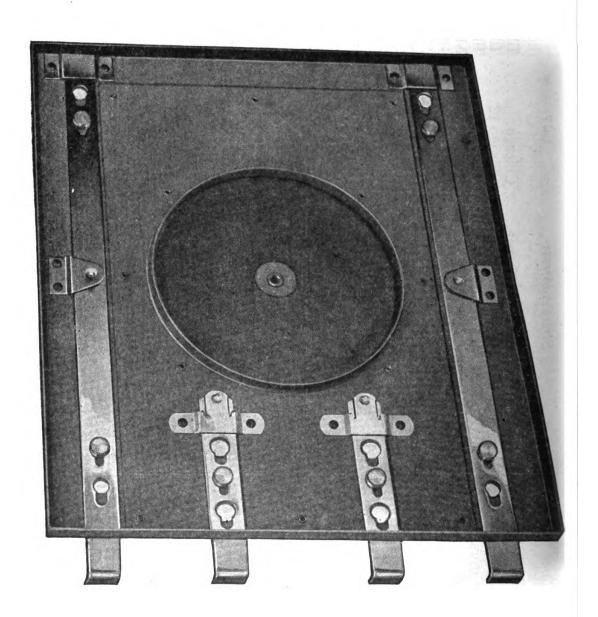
Mounting Plate FT-363-B, bottom view.
